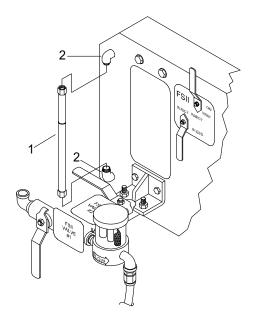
Fuel Additive Injector Assembly Calibration Gauge Removal.
